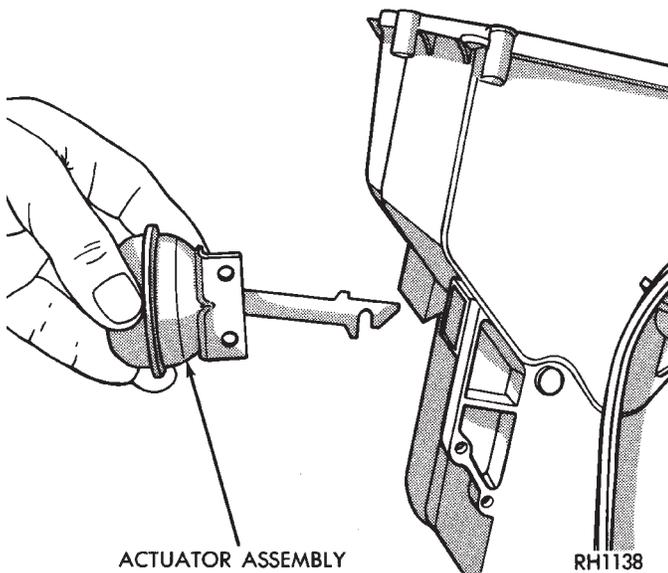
Removing or Installing Heat/Defrost Vacuum Actuator Assembly
